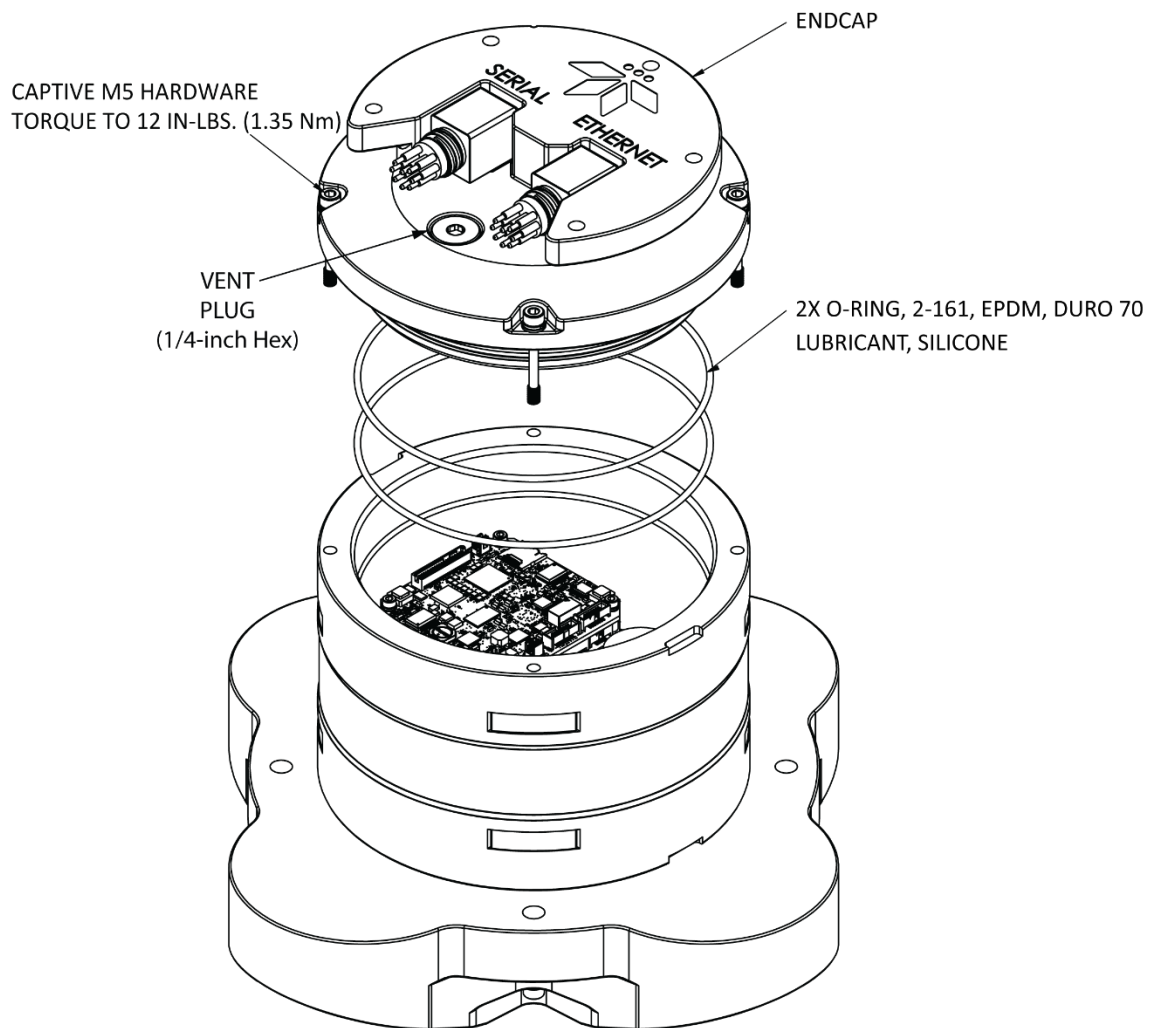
300/600 kHz Direct-Reading Parts Location – Endcap
